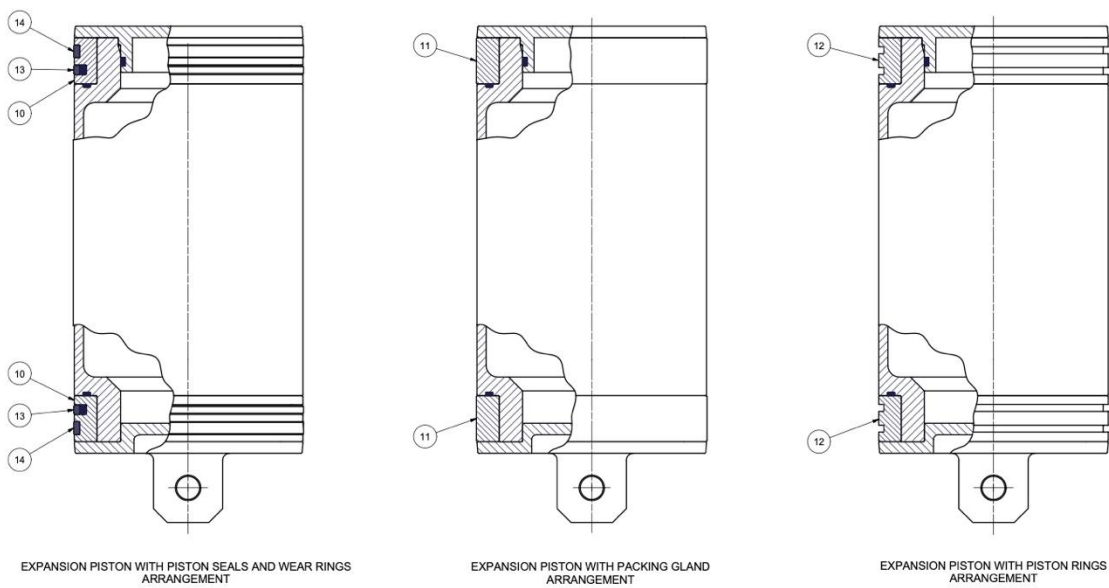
Section of ‘Sub Assembly of Expansion Piston’ technical drawing produced by the University of Southampton EDMC for this project. Section highlights the piston design and available sealing options. (10) = Piston sealing mechanism housing. (11) = Piston PTFE packing. (12) = Piston ring housing. (13) = Energised PTFE ring. (14) = Wear ring.
